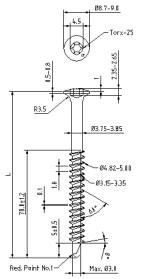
ISO-TAK Steel Deck Screw BS 48 - Ø 4,8 mm, tempered steel SHE 1022, drill point, trumpet head, and Torx-25 countersunk hexagon head
